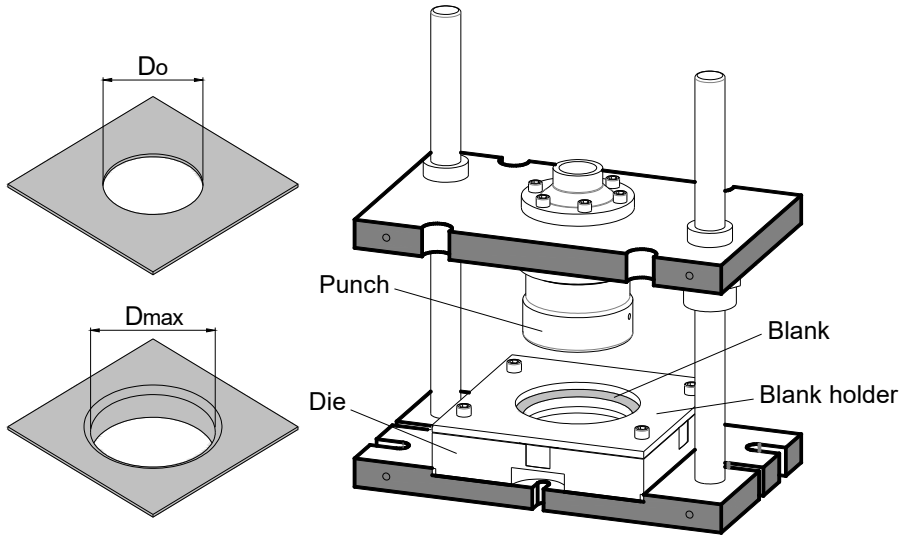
Schematic of conventional hole flanging, (left) specimen with an initial pre-cut hole and finished hole flanging, and (right) the conventional press working setup. Montanari *et al.*, 2013
